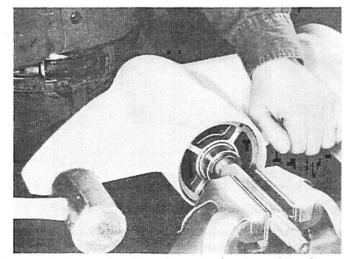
Removing Propeller Shaft Assembly from Gear Housing
